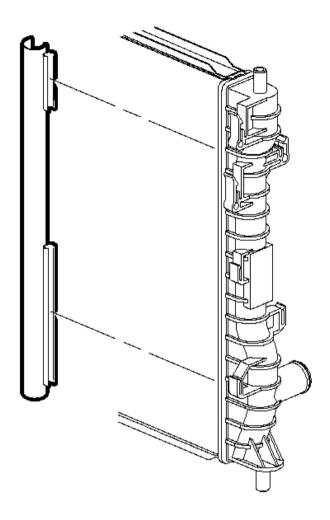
View Of Radiator Seals Courtesy of GENERAL MOTORS CORP.
